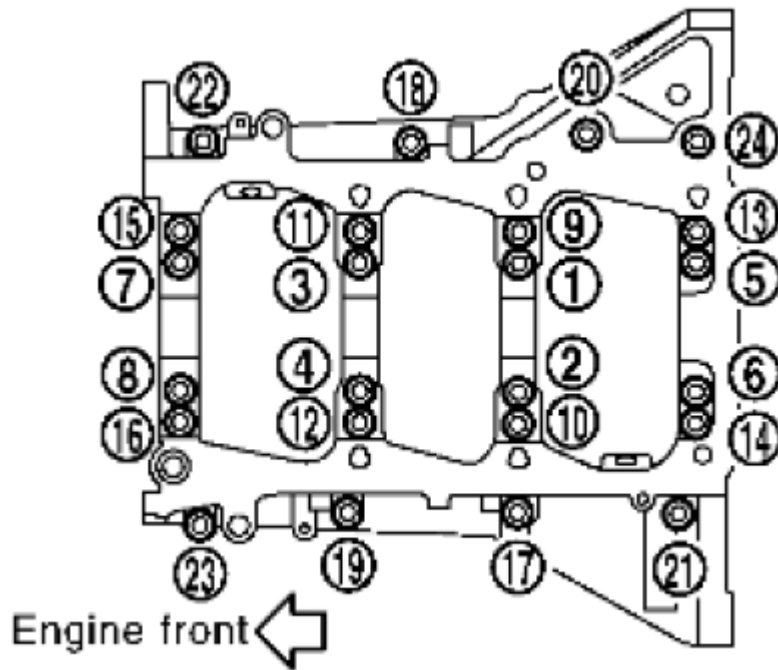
Identifying Lower Cylinder Block Bolts Tighten Sequence
